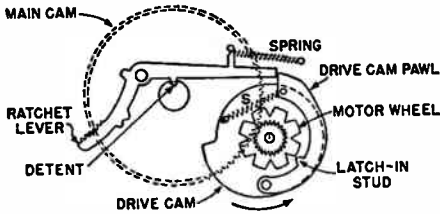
The ratchet lever holds the drive-cam panel away from the motor wheel until the trip mechanism is actuated.
